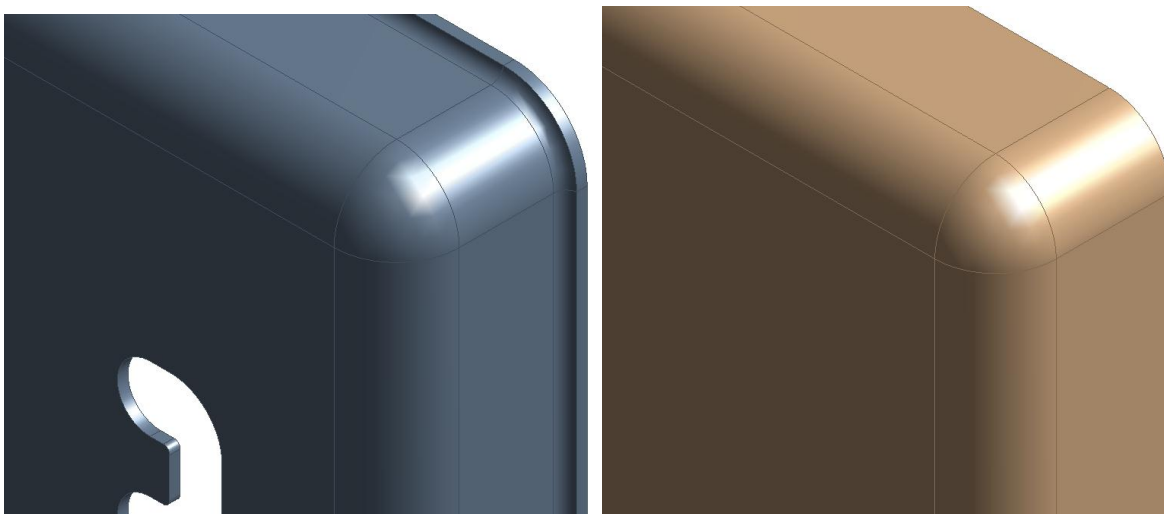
Shielding design before (left) and after (right) removal of pressed edging and punched holes
